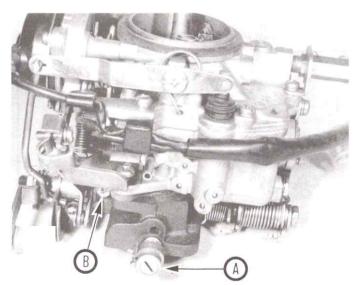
Special screwdriver to turn idle mixture screw (Sec 10)
